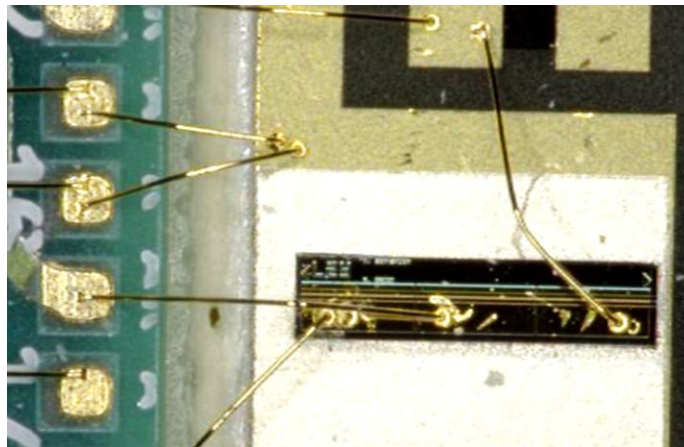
A 3-electrode laser device mounted on a printing circuit board with 3 wire bonded electrodes
